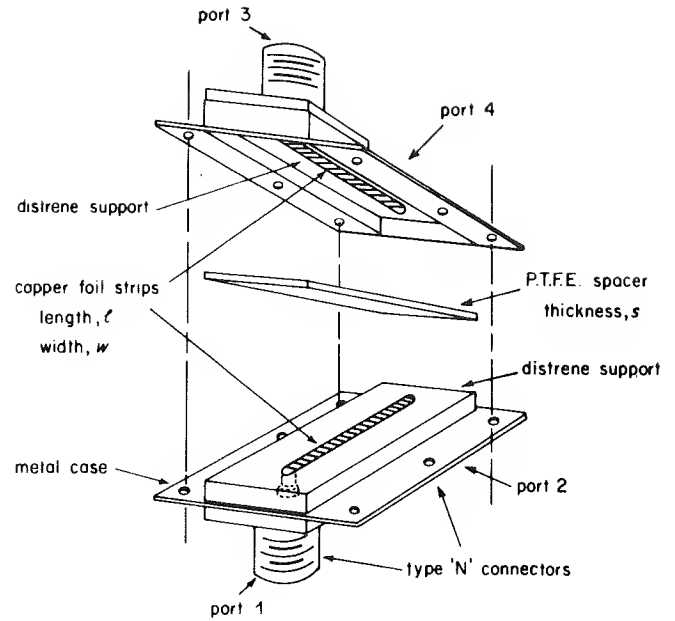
Construction details of 6 dB and 0 dB couplers
